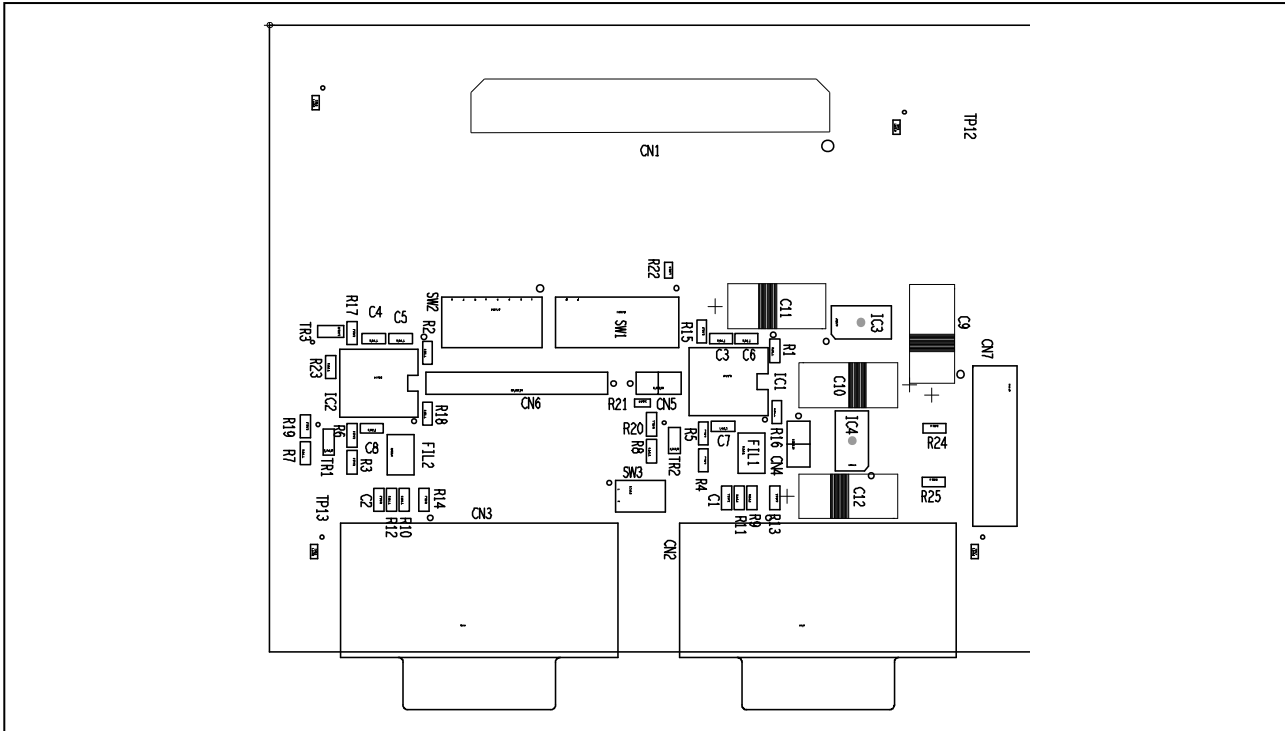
System View Salvator X(S)- and CAN Extension Board
